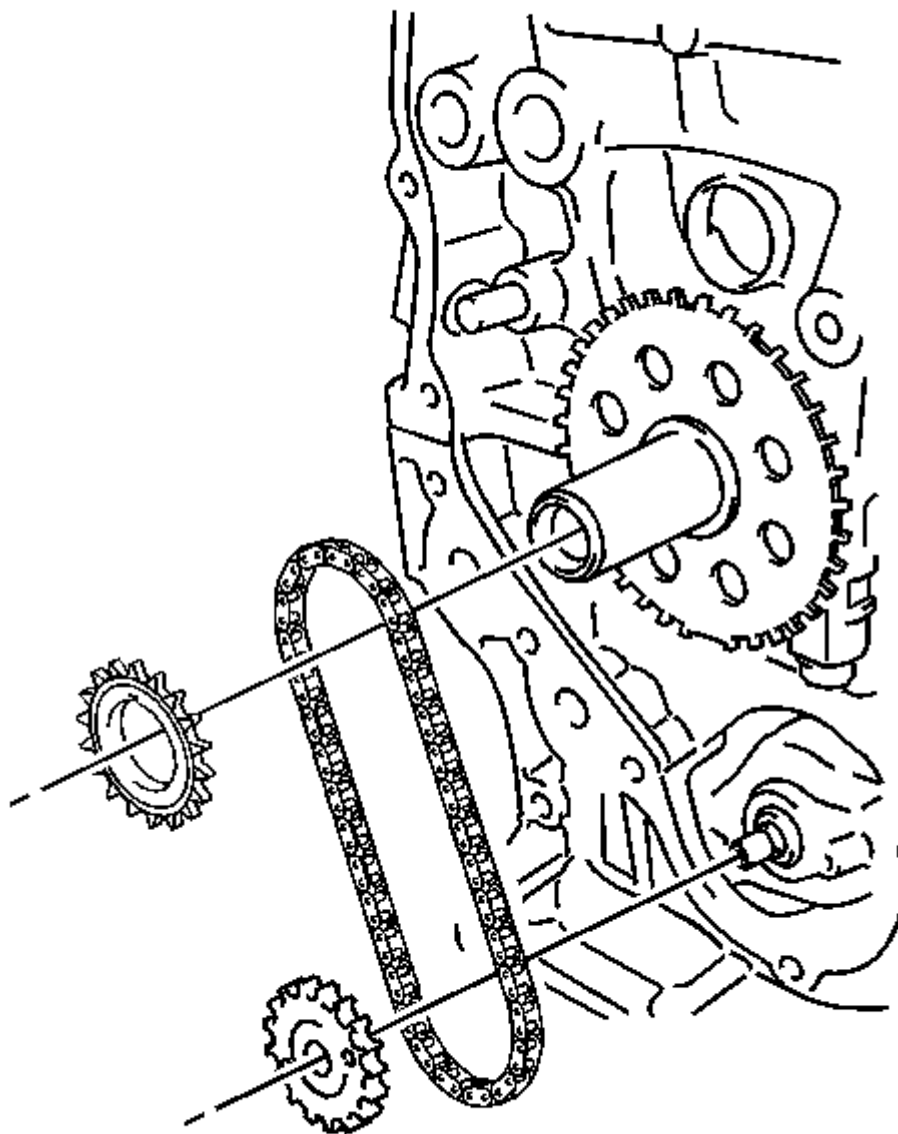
View Of Crankshaft Timing Sprocket, Oil Pump Drive Shaft Gear & No. 2 Chain
